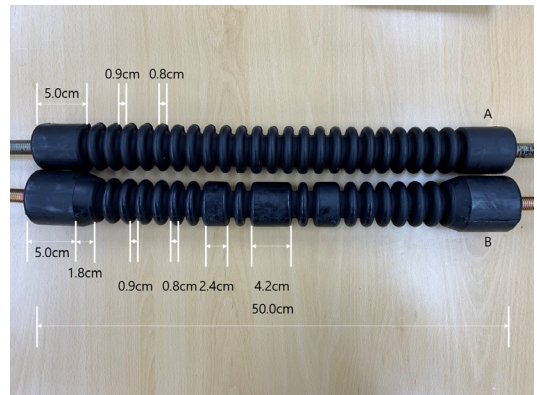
The blockage prevention installation device spring ((A) mono mass (B) multi mass).
